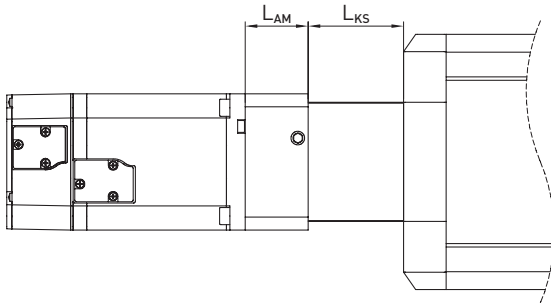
Motor connection of linear table HT-S without belt drive
